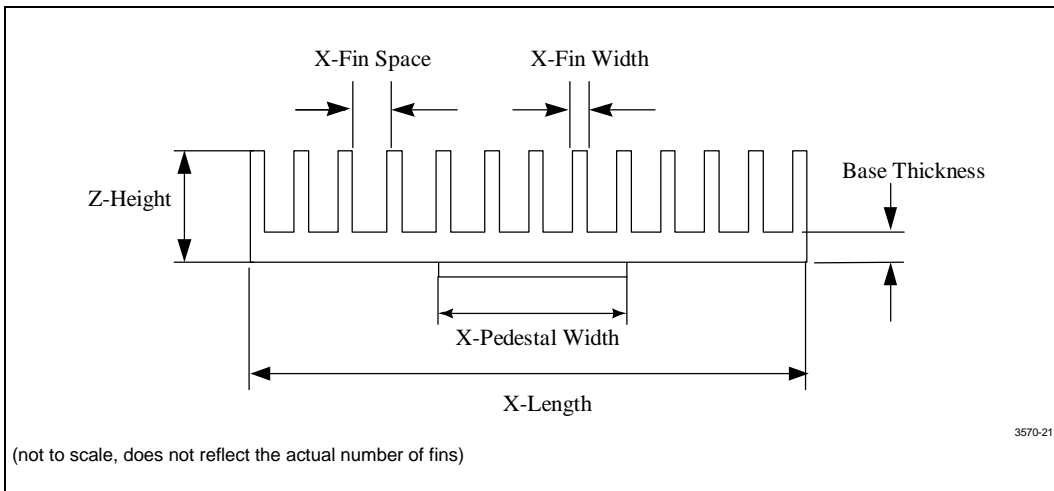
Typical Heat Sink Dimensions (View from Side-X)
